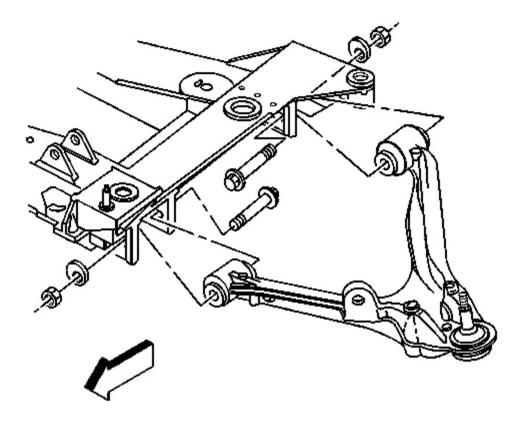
Lower Control Arm & Bolts Courtesy of GENERAL MOTORS CORP.
